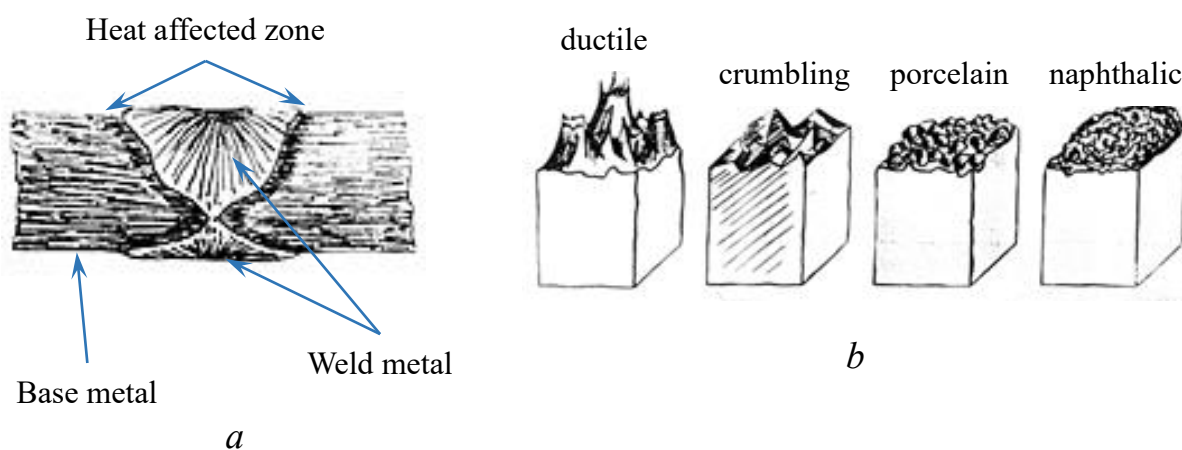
Schematic draw of macrostructures of weld joint (*a*) and typical fractures (*b*)
